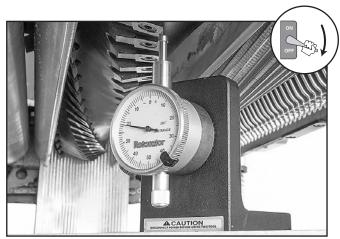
Example of using a Rotacator to find cutterhead BDC.
